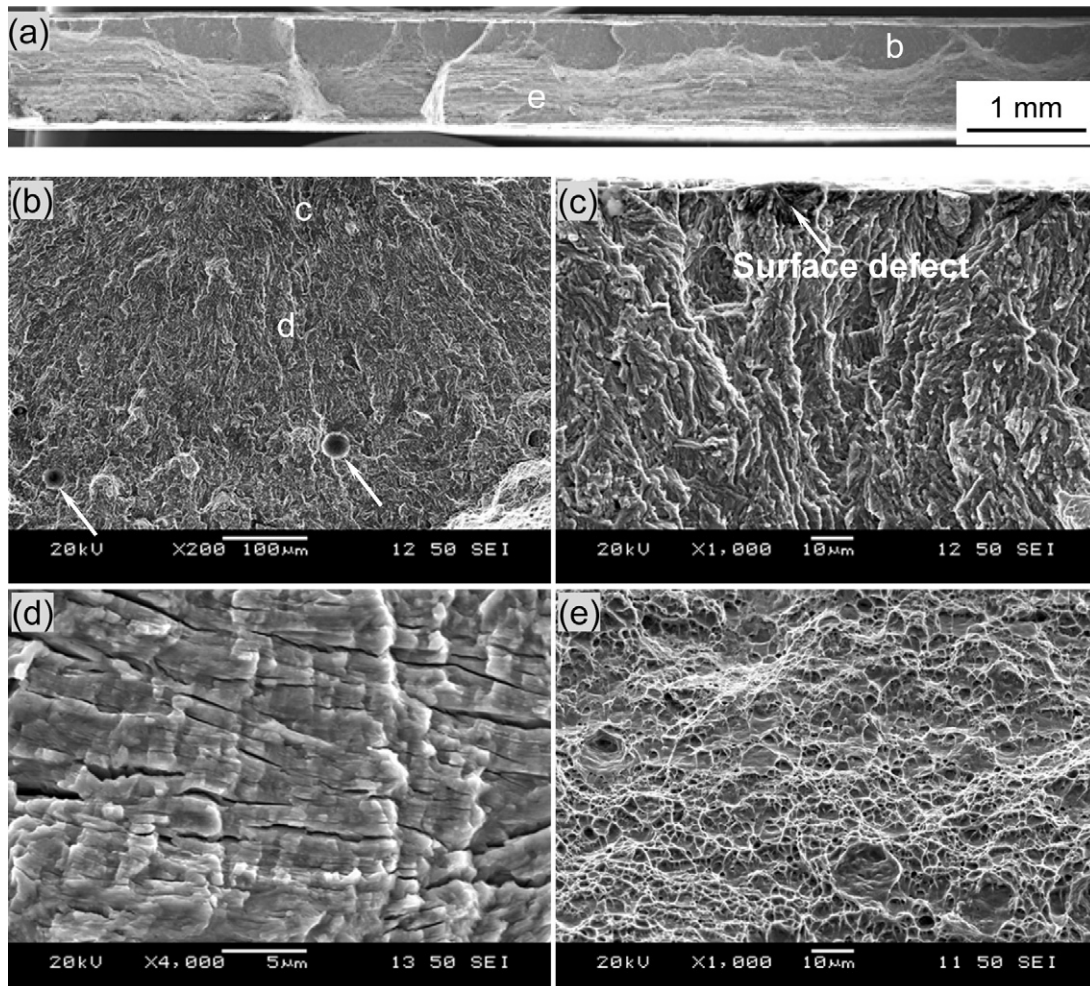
Typical SEM images of fatigue fracture surface of a FLWed DP980-S joint tested at a stress amplitude of 350 MPa, (a) overall view, (b) fracture surface at a larger magnification, (c) crack initiation area, (d) crack propagation area, (e) final fast propagation area.
